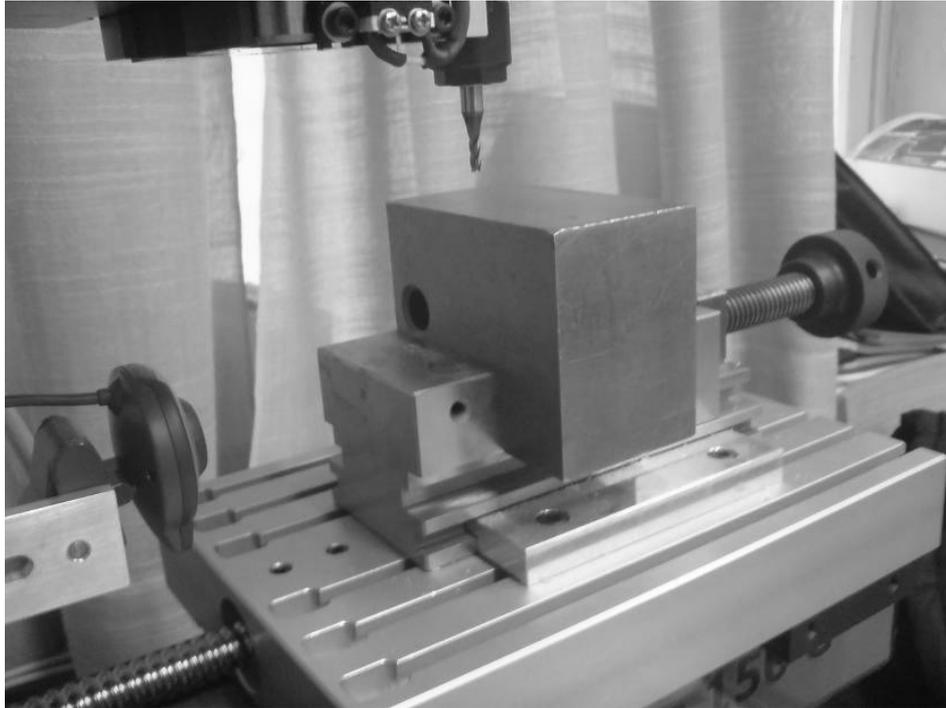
Test workpiece inserted in the LAKOS 150G milling machine.
